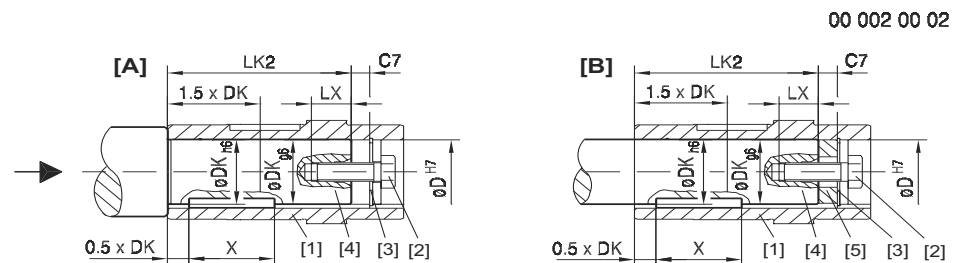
Customer shaft with contact shoulder (A) and without contact shoulder (B)
